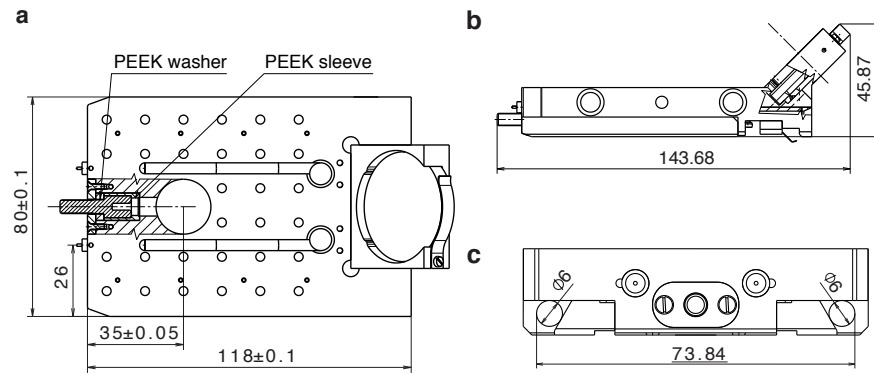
Technical drawings of the science platform a, Top view with a cut through the front screw bearing that connects the platform to the docking station. b, Side view showing the mirror angled at 45° for optical access along the transfer axis. c, Front view with SMA contacts. The width of the science platform including the angled dove-tail wings was determined with gauge cylinders. All measures in mm.
